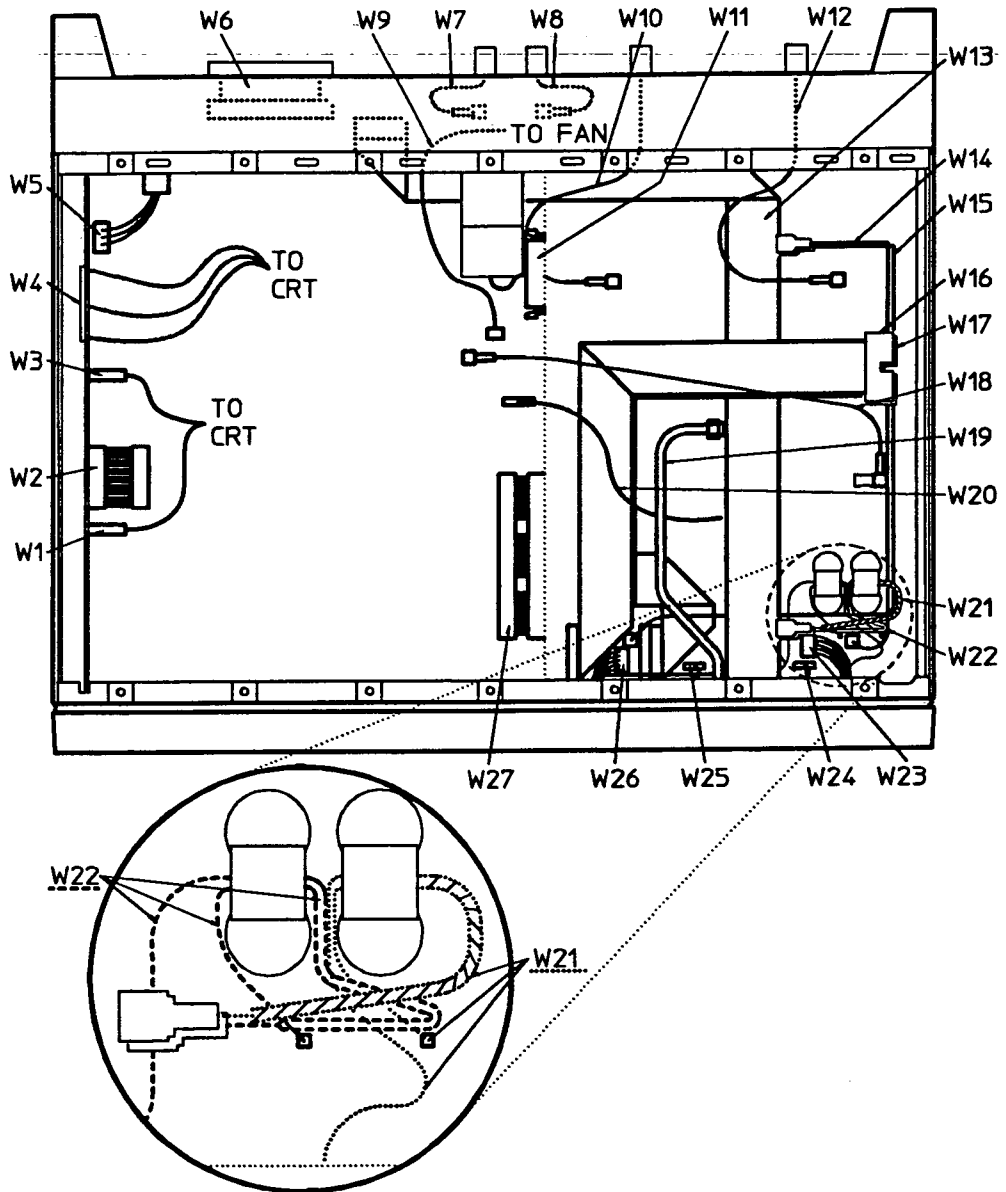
HP 8991A Peak Power Analyzer Cable Assemblies
